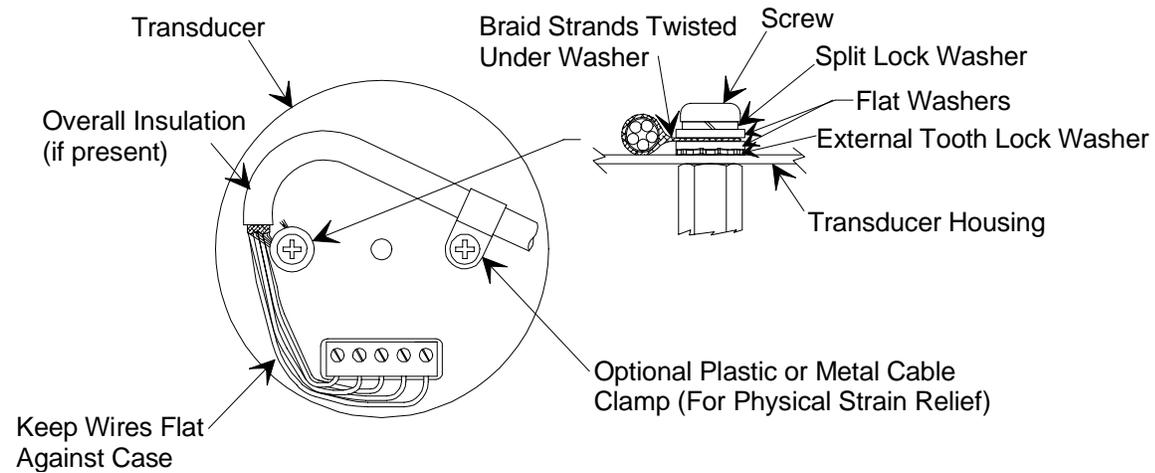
Alternate Method To Connect an Overall Metal Braided Shielded Cable
